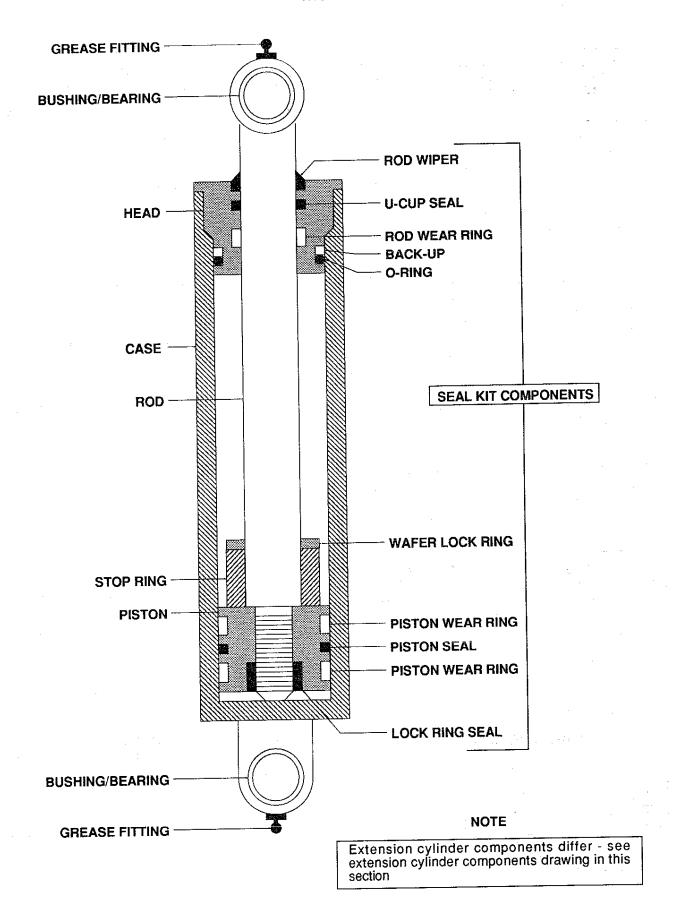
TYPICAL CYLINDER AND SEAL KIT COMPONENTS
